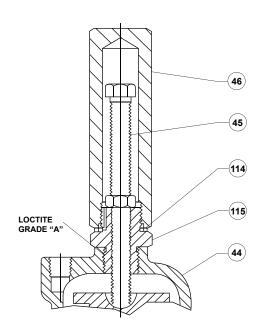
Sealed Adjusting Screw Assembly for Type 99 Regulator with Type 61H (High Pressure) Pilot Parts
